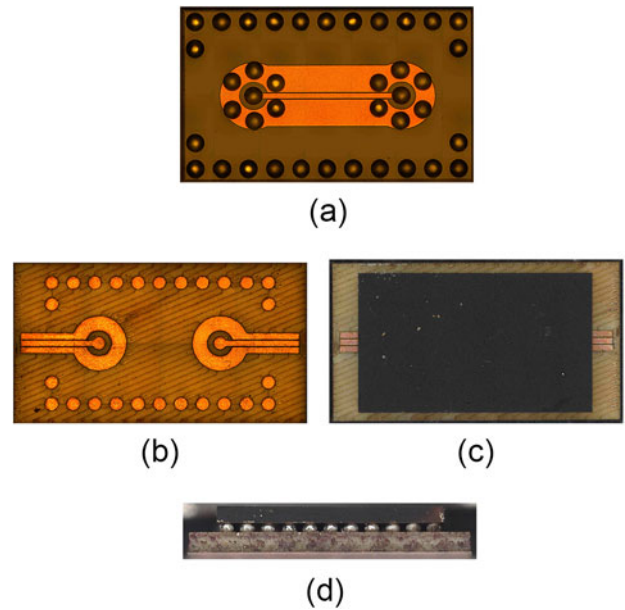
Package-to-PCB interconnect based on quasi-coaxial signal transition: (a) eWLB package; (b) PCB; (c) top view of assembled package; and (d) side view of assembled package.
